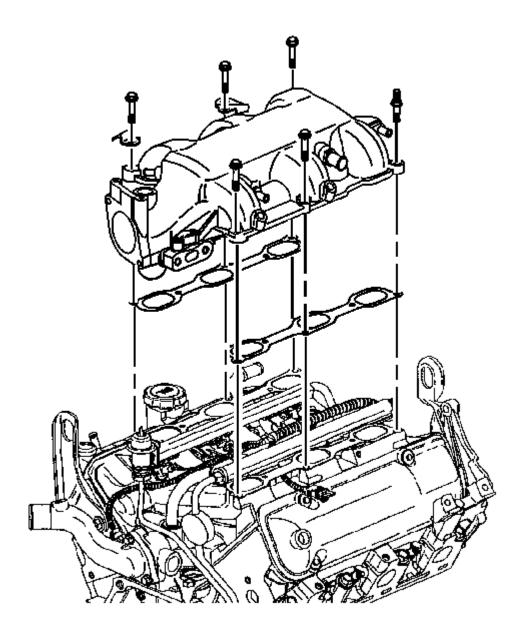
Throttle Body Courtesy of GENERAL MOTORS CORP.
